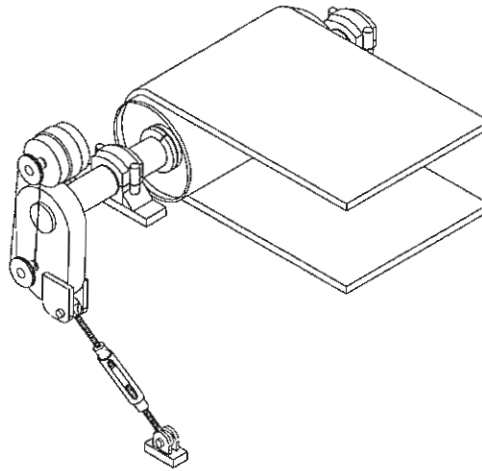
Representation of a typical parallel, shaft-mounted reducer drive assembly
